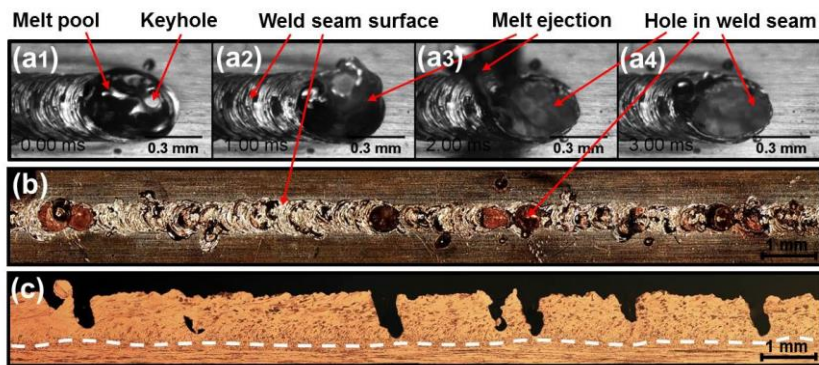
Series of single frames out of a high-speed video of a welding process in Cu-ETP showing the formation of a melt ejection (a1-a4). Top-view (b) and longitudinal cross-section (c) of a weld seam in Cu-ETP; welded with a welding speed of $6\ \text{m/min}$ and an incident laser power of $1500\ \text{W}$ at a wavelength of $1\ \mu\text{m}$. The white dashed line indicates the penetration depth of the welding seam.
